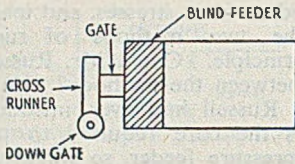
FIG. C.—Diagram showing One Method of Running and Feeding a Plate Casting.
